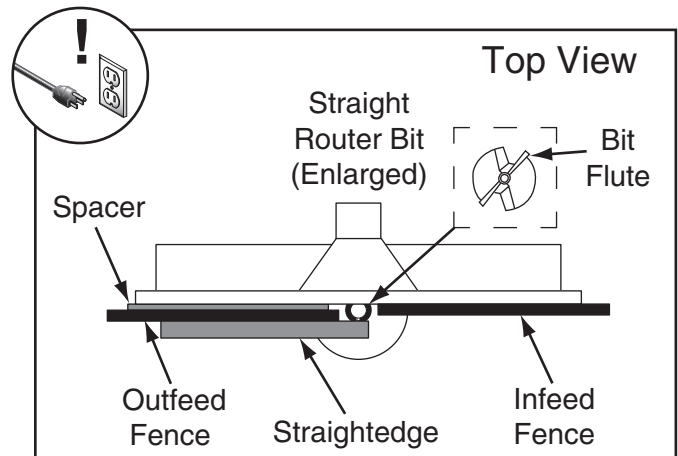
Measuring fence setup for edge jointing (guard removed for clarity).
